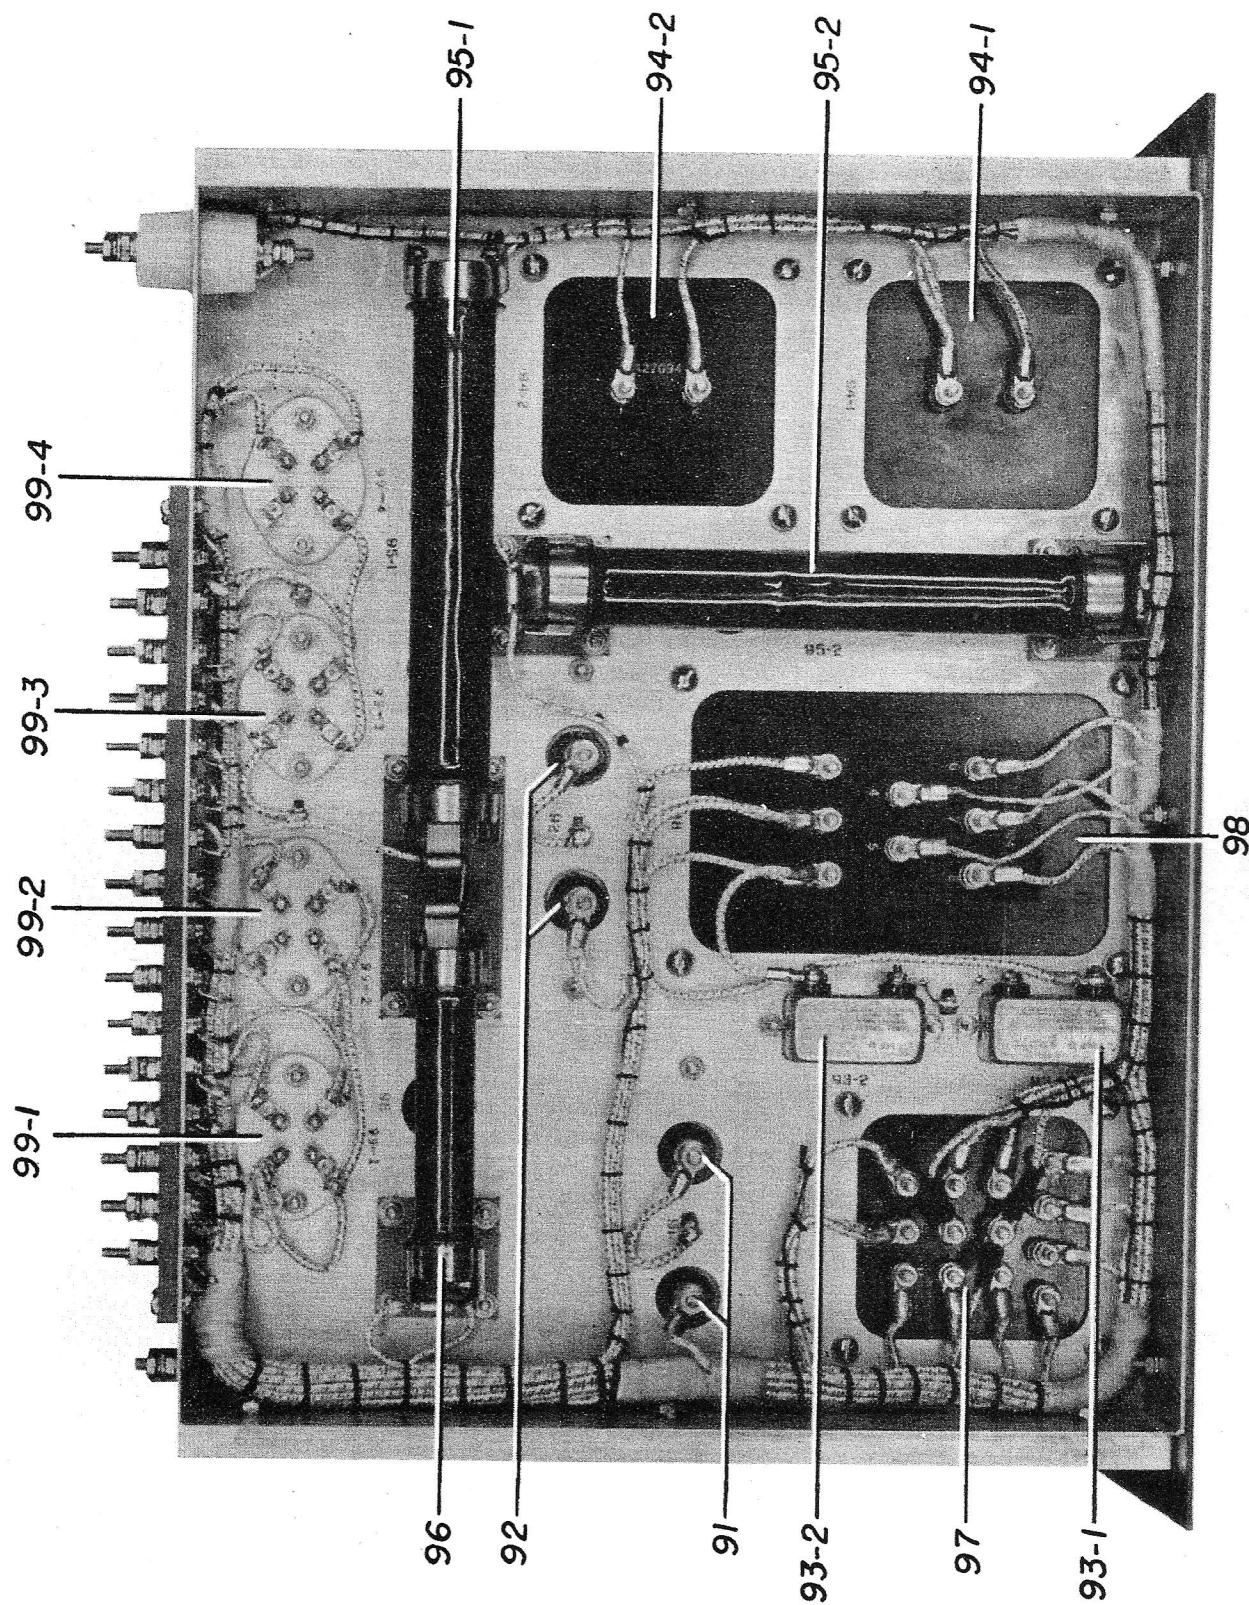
Power Supply Panel PN-12-A, Bottom View
